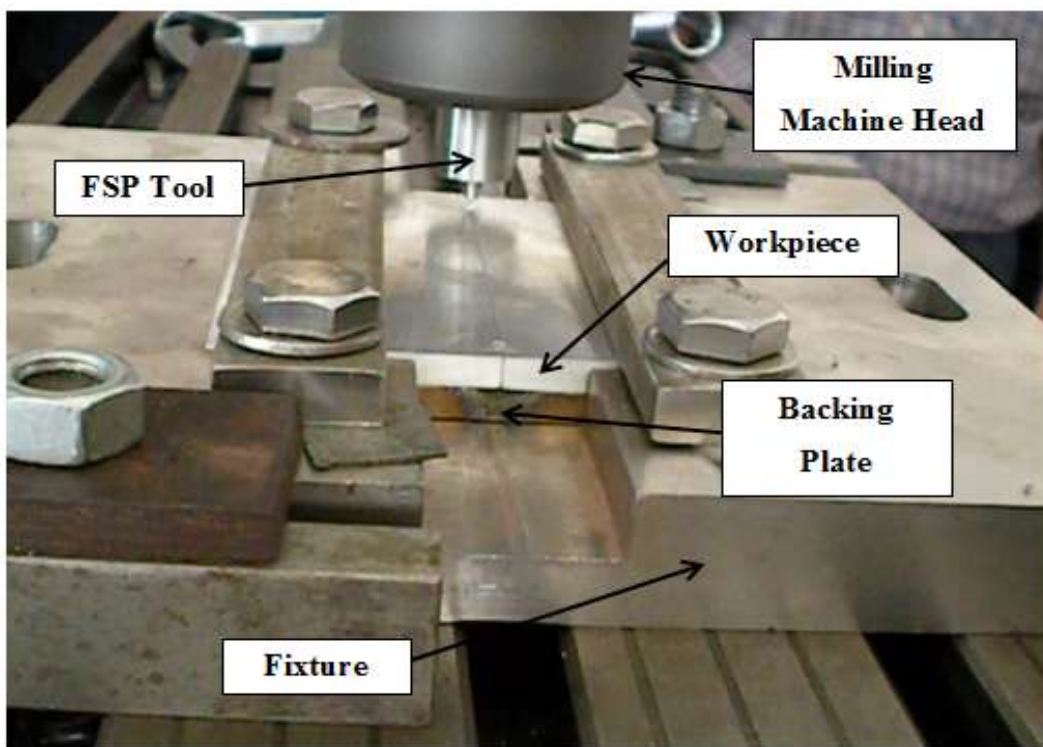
Fixture holding a workpiece on vertical milling machine bed
